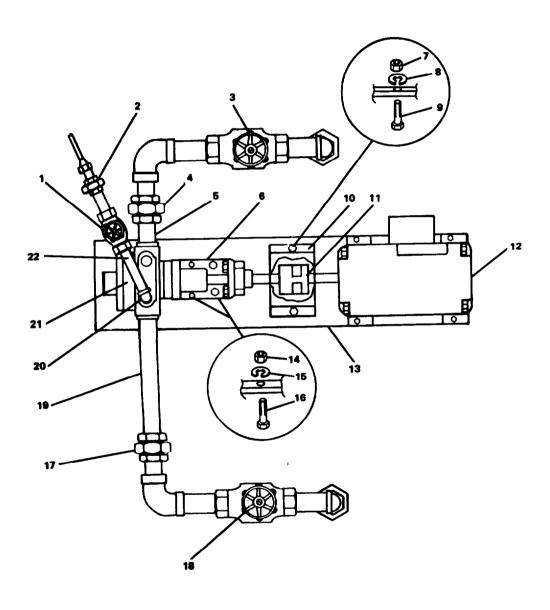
Rotary Pump Unit (Dirty Lubricate Oil).
